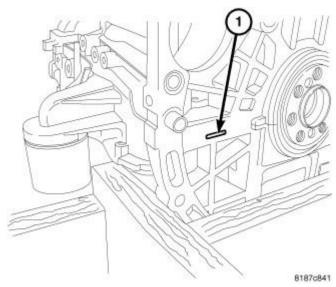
Crankshaft Bearing Positioning Tool & Main Bearing Courtesy of CHRYSLER GROUP, LLC
